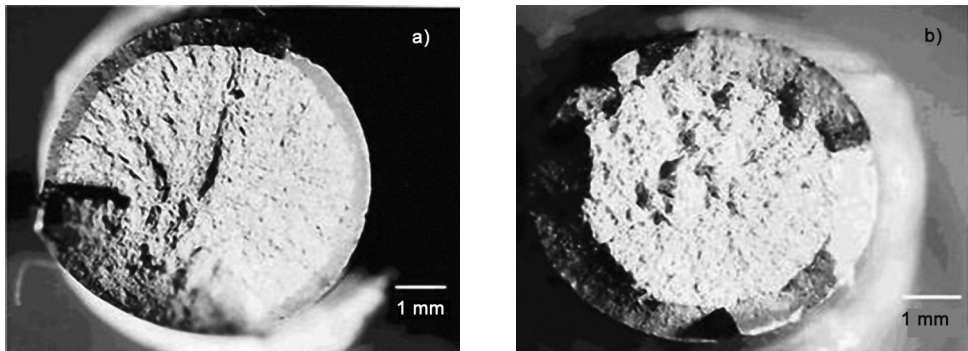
Macrofracture surfaces of tensile tested specimens with:
